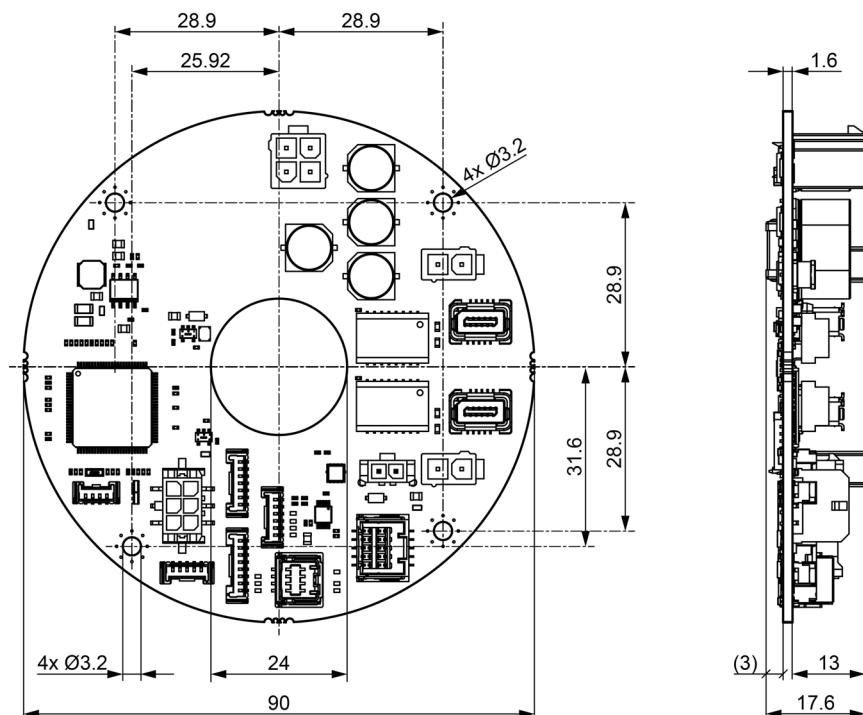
EPOS4 Disk 60/12 EtherCAT SSC (709862) – Dimensional drawing [mm]
